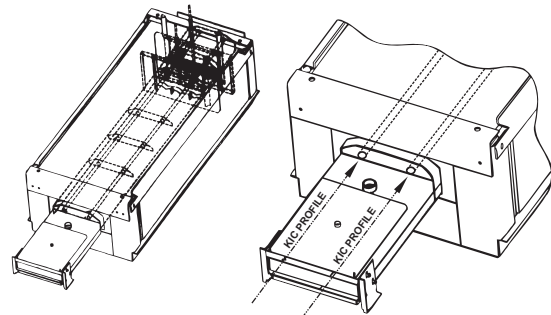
Typical Furnace Muffle Showing Location of Probe Tubes
